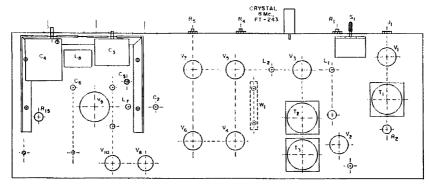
Top-of-chassis layout of the 6-meter s.s.b. transmitter. This drawing is to scale and may be used for layout dimensioning; 1/4 inch in the drawing above equals one inch of actual chassis size.
